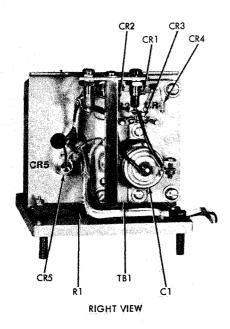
+950 Volt DC Power Supply, Assembly 2A2, Test Points and Parts Location
